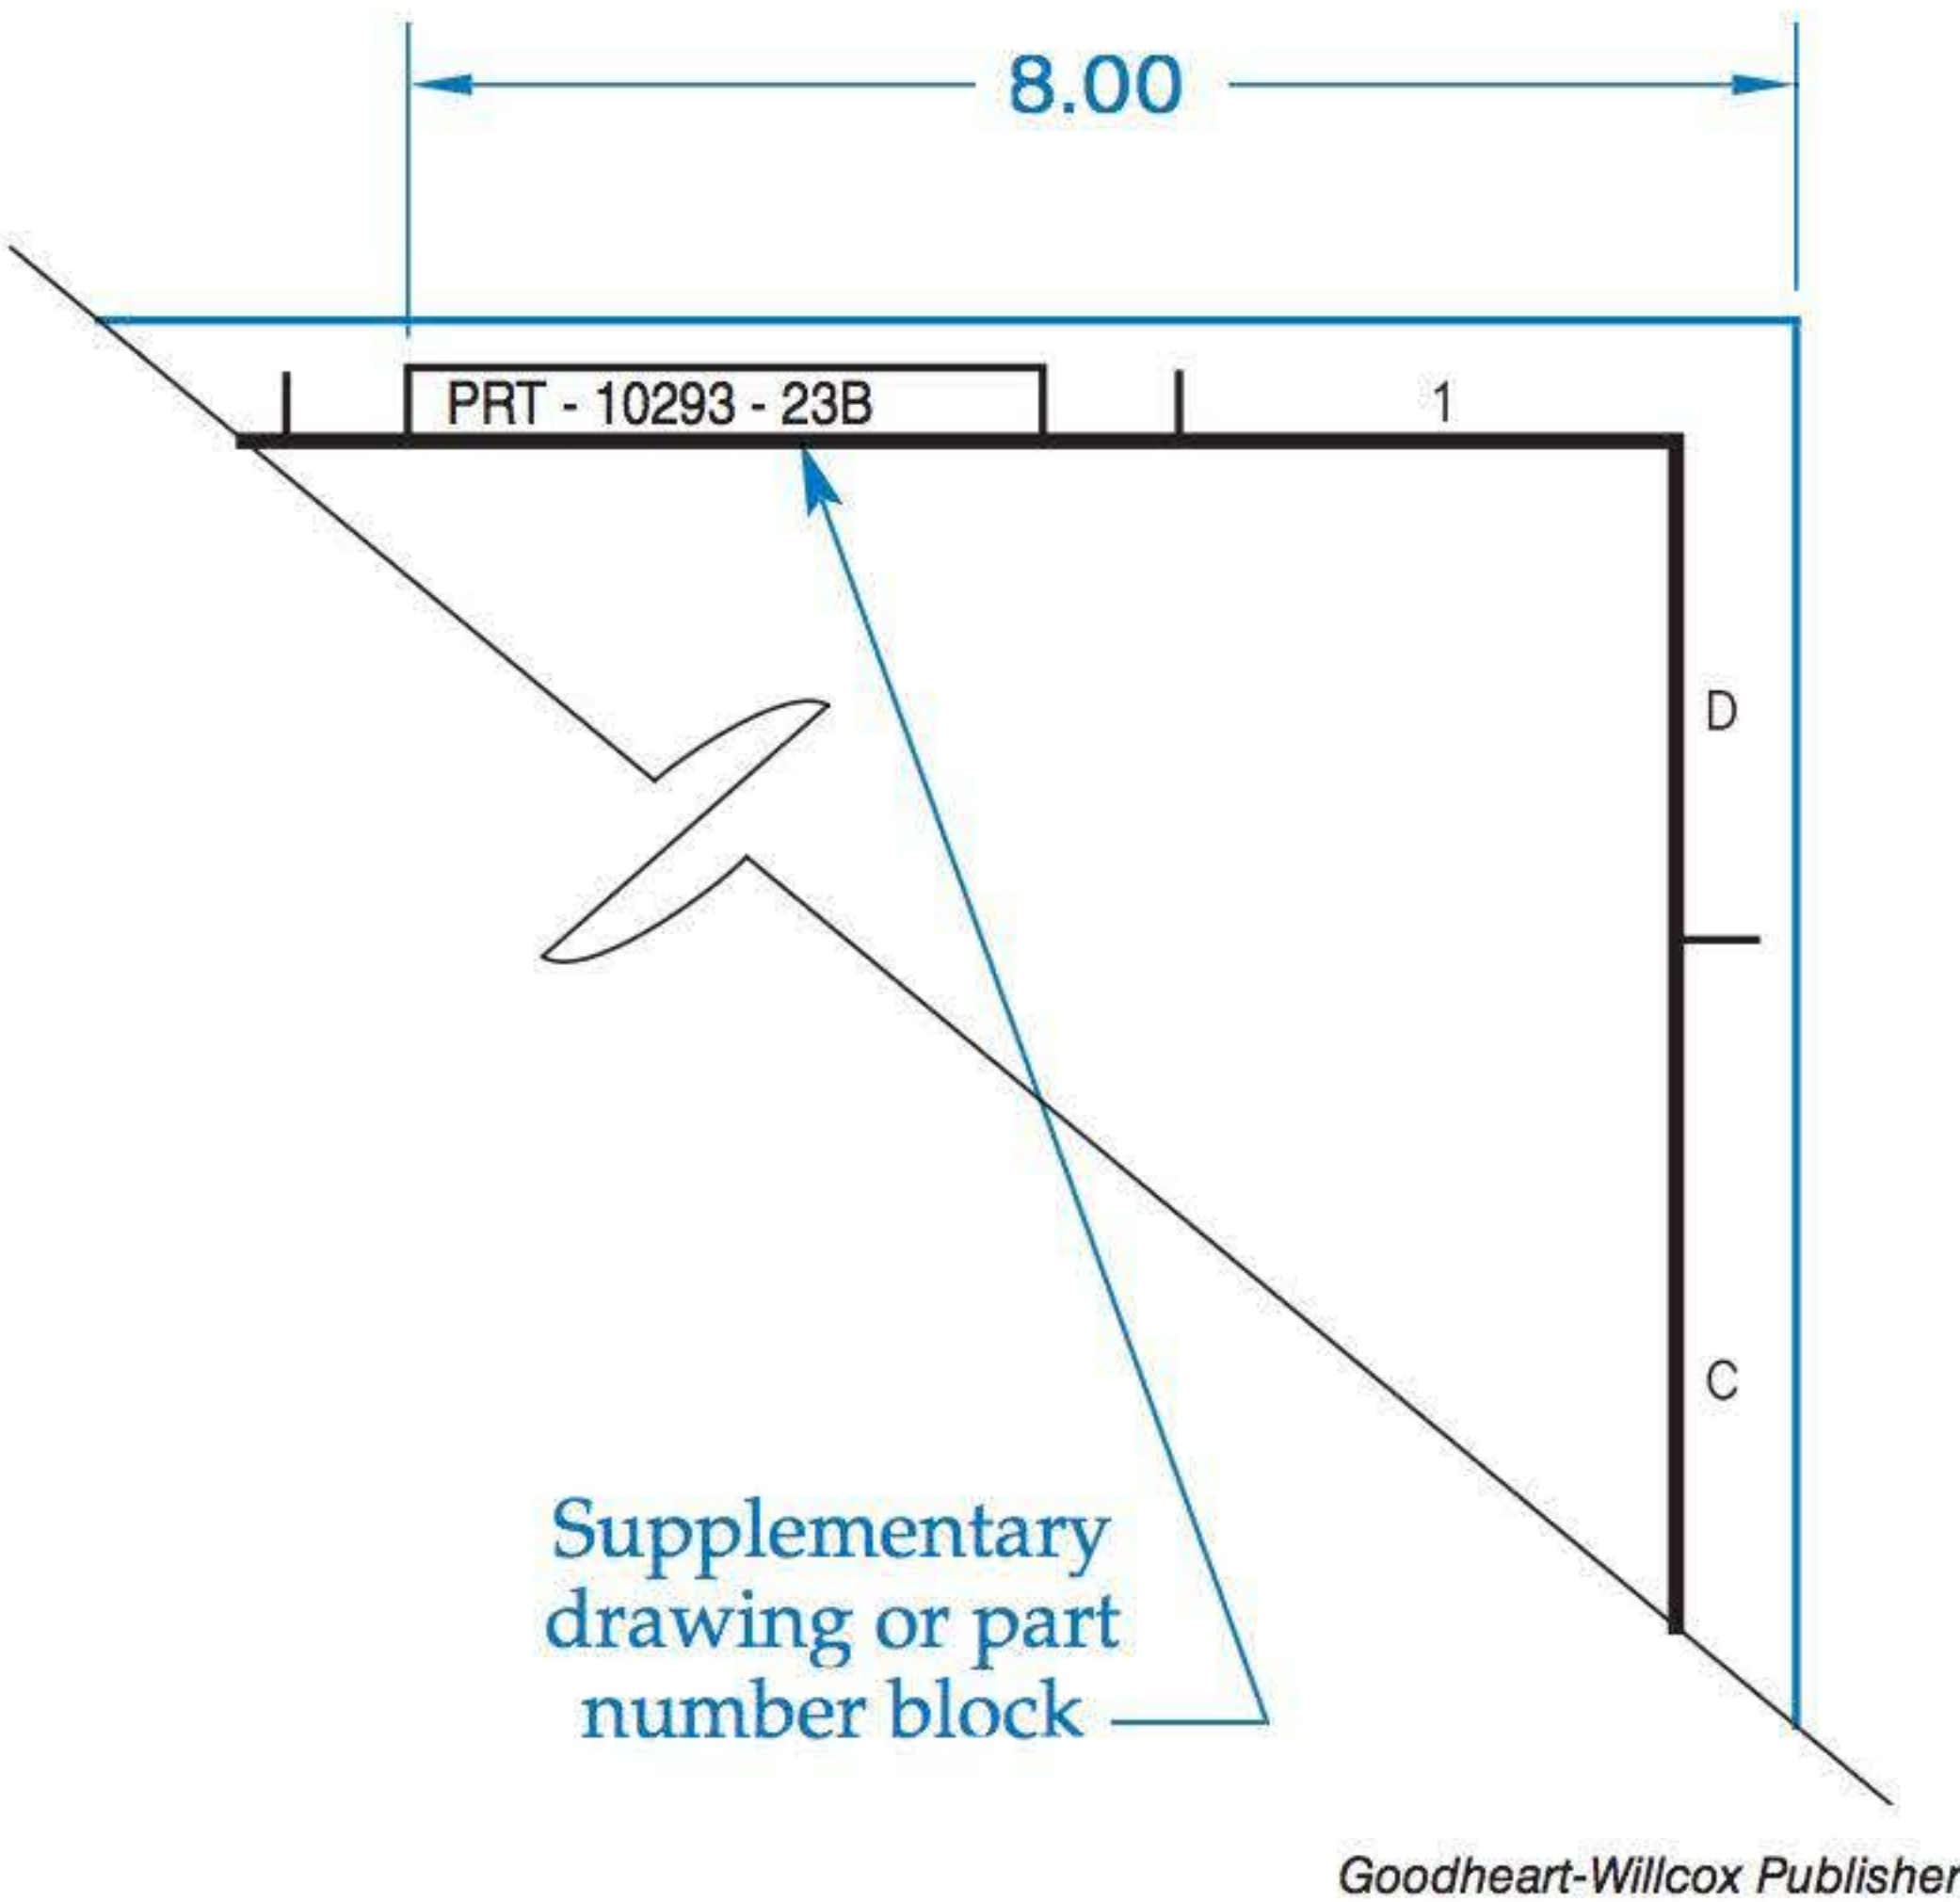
Standards allow for the drawing number to be shown in the margin to aid in finding a drawing in the filing drawer.
